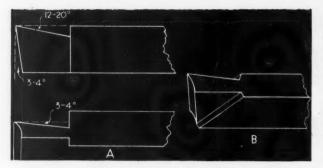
Drawing illustrating method of grinding a Parting Tool by (A) the usual method and (B) an improved method which provides support on each side of the blade.
